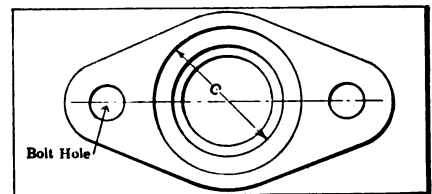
Plan view of a brazed pipe flange showing the bolt holes
